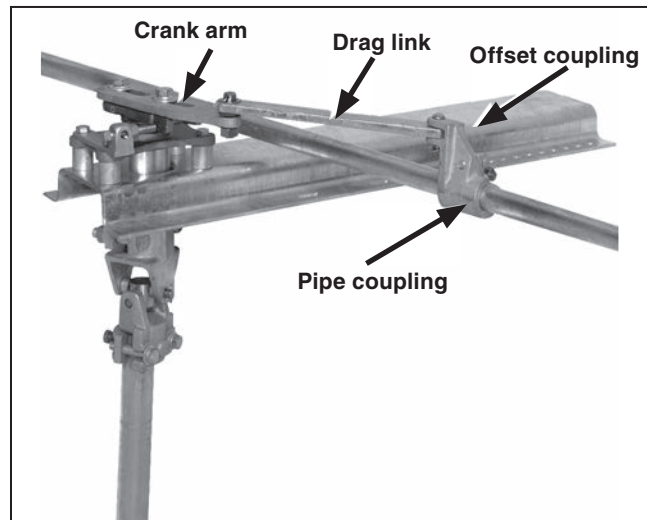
Typical outboard bearing configuration, upright mounted between pole-units, with drag link (flat-bar type).
